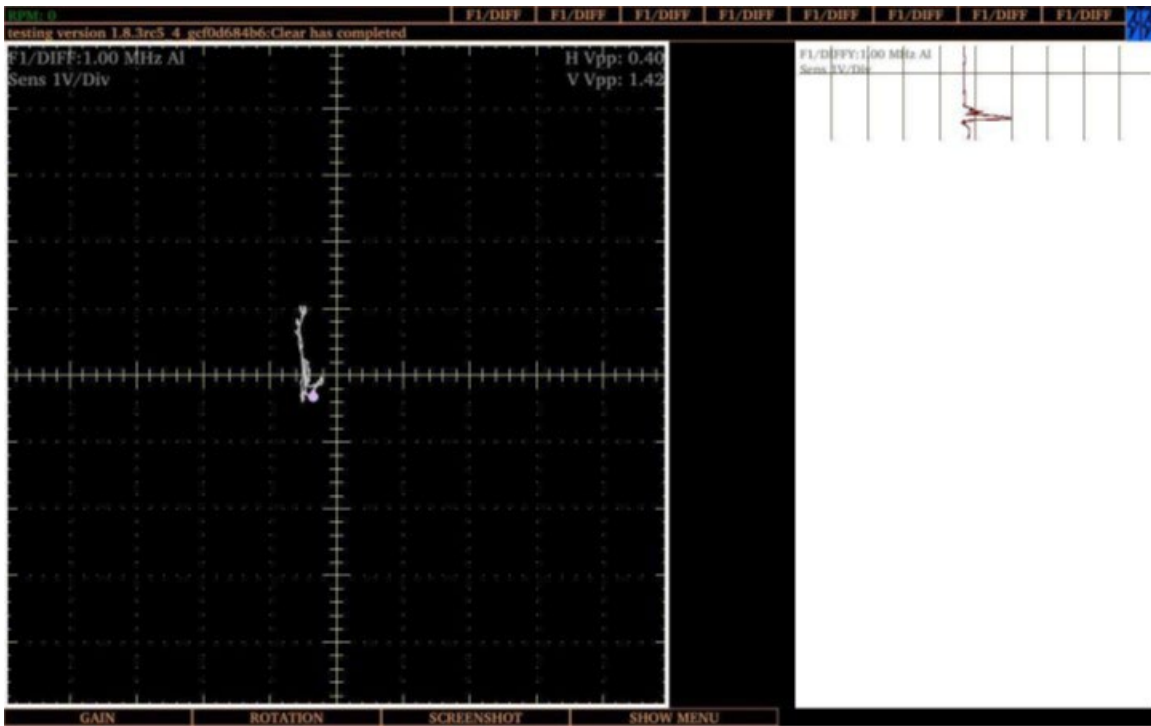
ET indication of defect at Location 3 in butt weld test panel MG-13
